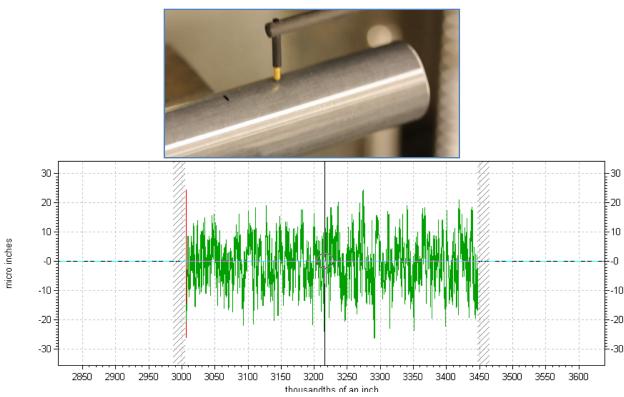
Profilometer stylus measuring anodized aluminum shaft surface and sample shaft roughness profile.
